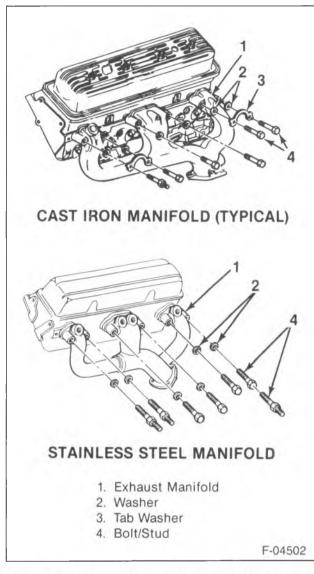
Exhaust Manifold (5.0L and 5.7L Engines)
